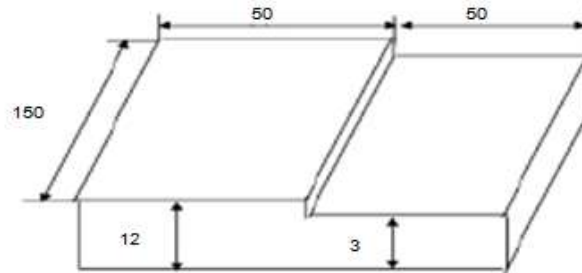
Schematic drawing of step bars, 3 and 12 mm sections, Dimensions are in mm
